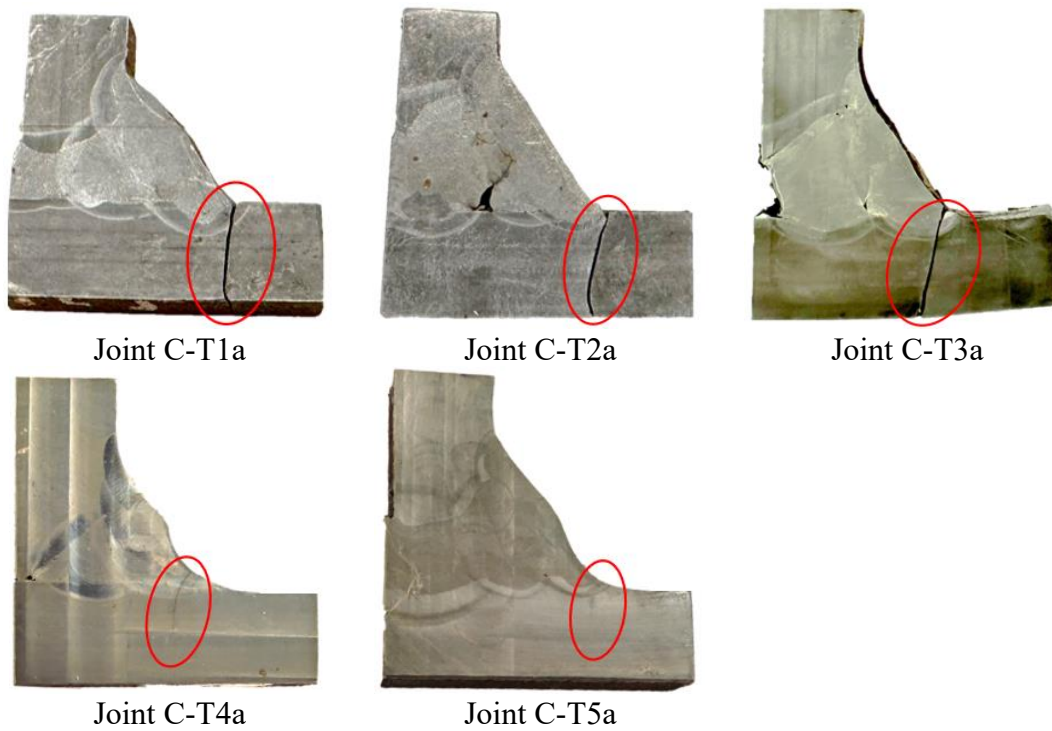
Crown parts of S690 welded T-joints after failure
